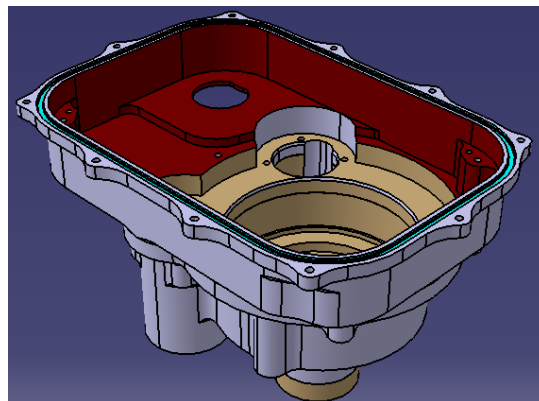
Actuator body in aluminium. Outline volume dimensions : 162x160x100mm
